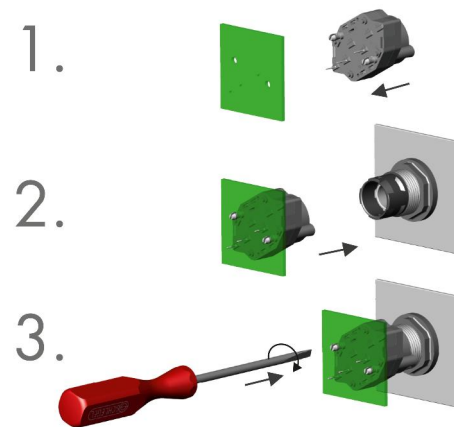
PCB-mounting with bolt for CZ... contact elements
